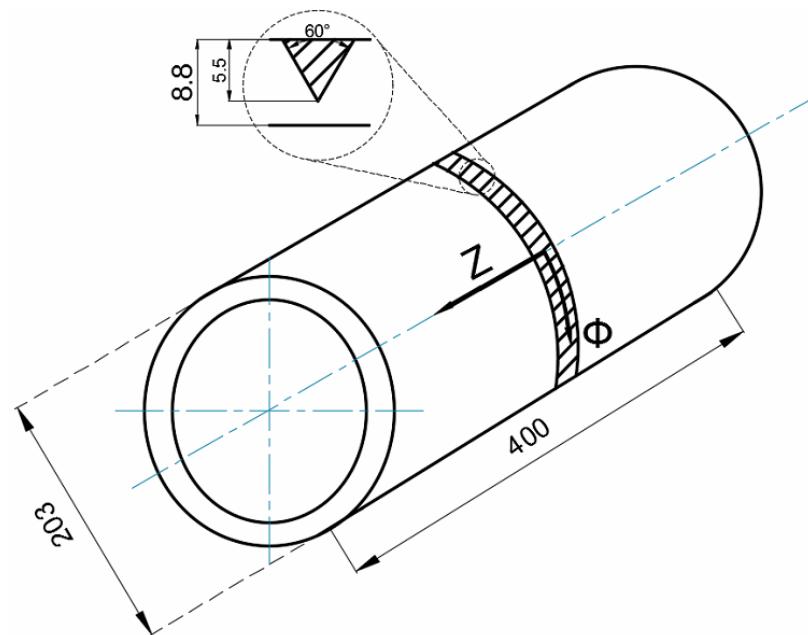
Pipe and weld dimensions with welding directions towards positive ϕ -direction (Jonsson and Josefson, 1988), dimensions in mm
